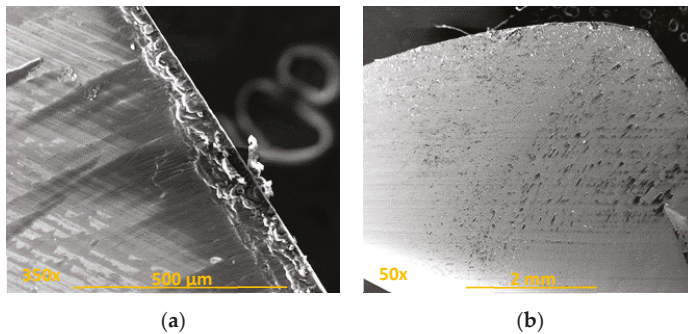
Wear by bonding mechanisms (BUL–BUE) on the tool after conventional drilling of the aluminium alloy UNS A97075: (a) Main cutting edge; (b) evacuation channel.
